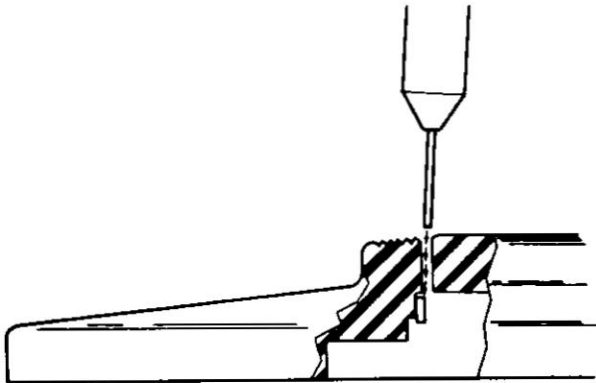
Insertion. End of Standard Escutcheon Tool Engages Edge of Latching Tab and Forces it Downward.
